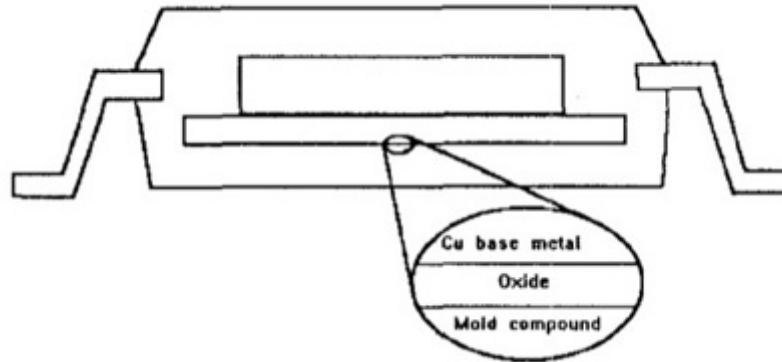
Copper oxide layer between base metal and mold compound [49].
